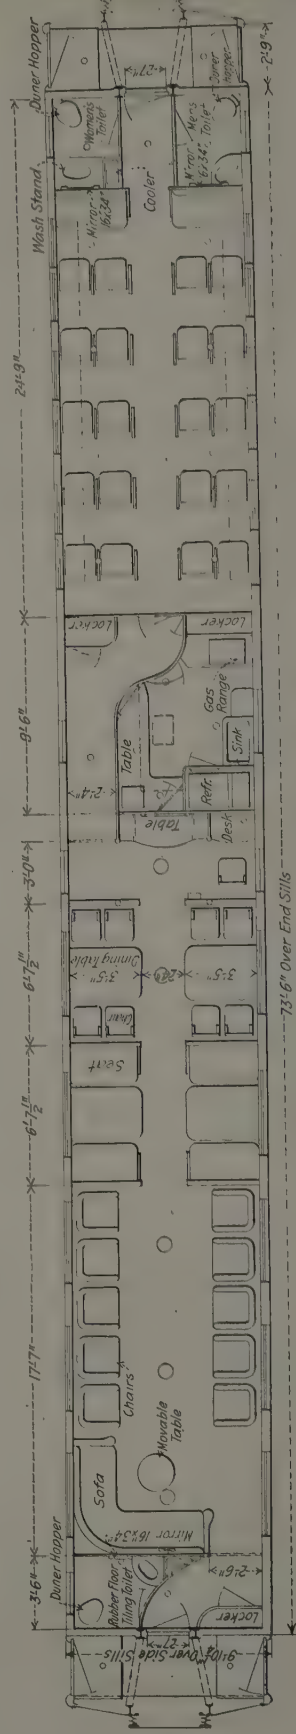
Floor Plan of Steel Club Car. Builder, The Pullman Company.
